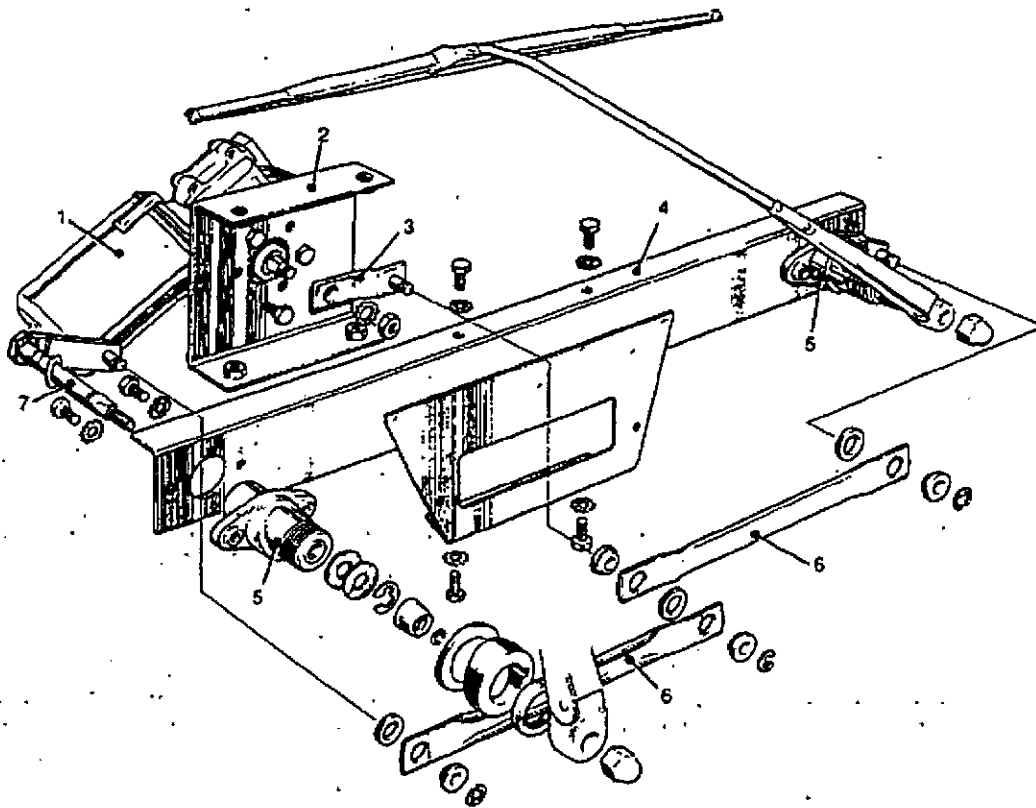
Wiper motor, links, pivot housings and mounting bracket
